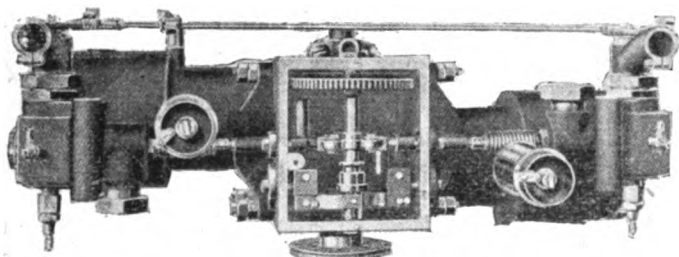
Plan of Motor with Crank Case Cover removed.
